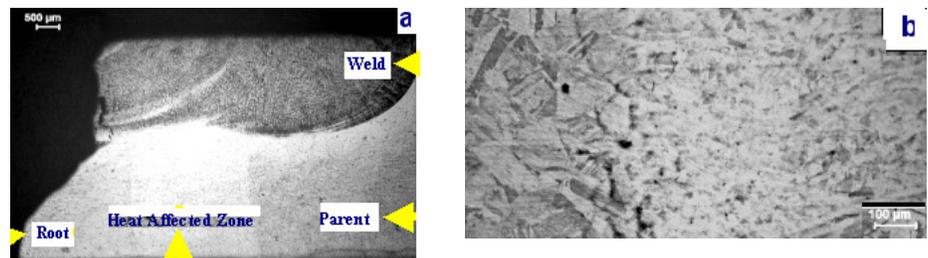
Images showing (a) weld bead separation (b) weld and parent metal interface showing micronorosity.
